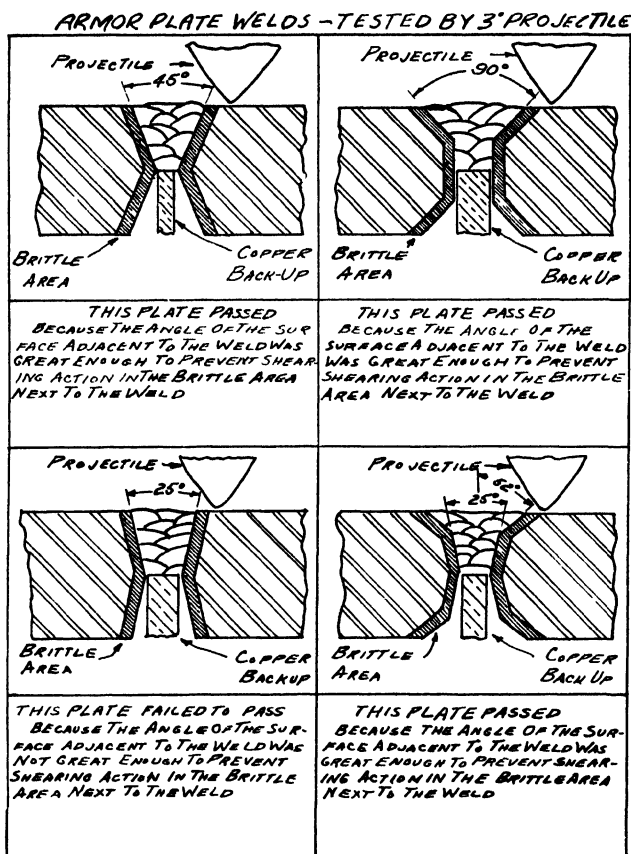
, (bottom left). First in series of welded test plates. Fig. 22, (top left). Second test plate. Fig. 23, (top right). Third test plate. Fig. 24, (bottom right). Fourth test plate.
